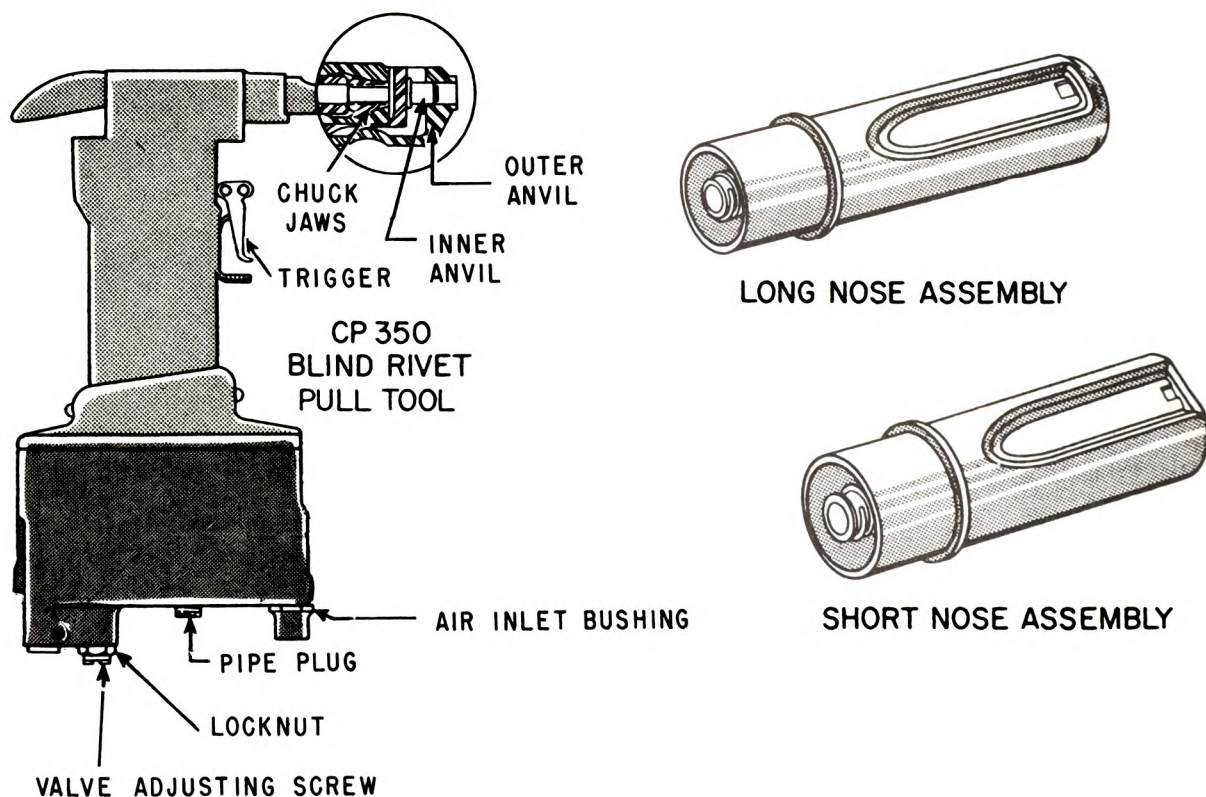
Self-plugging rivet (mechanical lock) pull tool.
